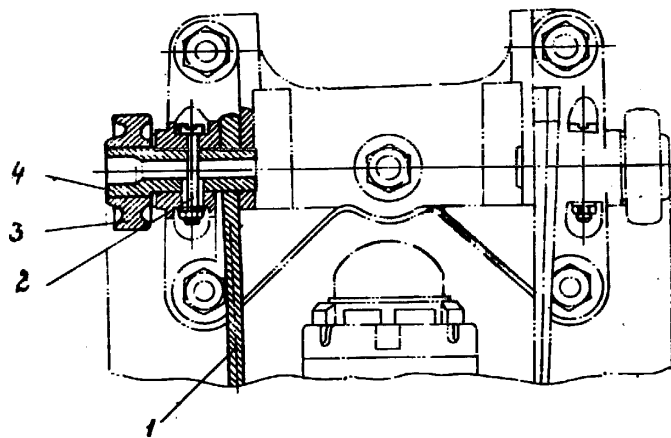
TCM-2500-00 FIRING MECHANISM UPPER ATTACHMENT FITTING
